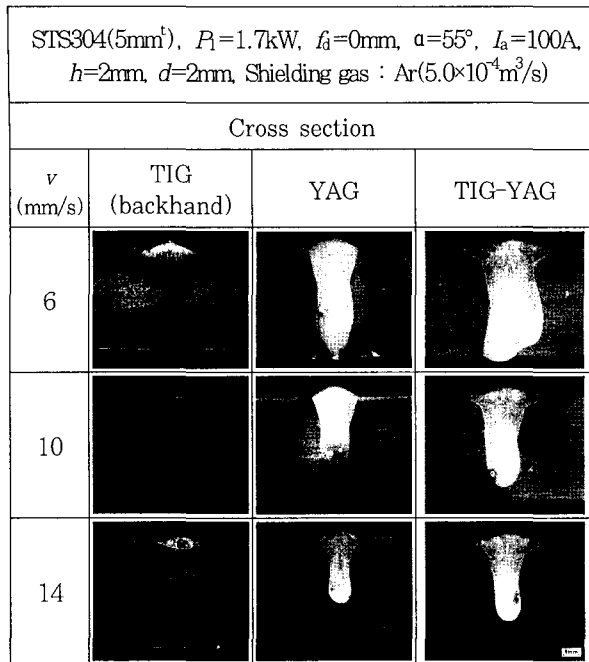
Cross sections of STS304 subjected to YAG laser, TIG arc and laser-arc hybrid welding at various welding speeds
